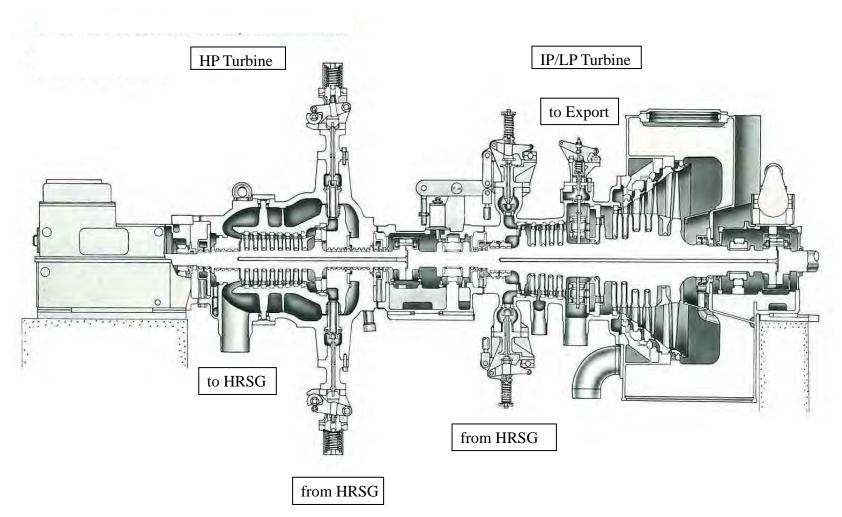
Longitudinal Section of Typical Steam Turbine
